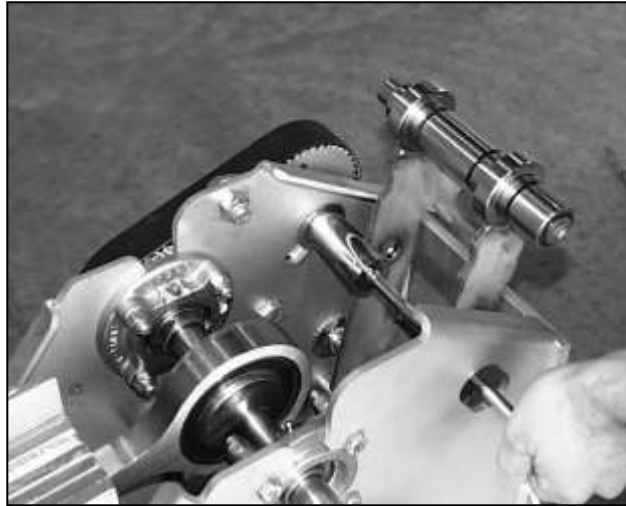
Tightening the Tensioner Sprocket Jam Nut
